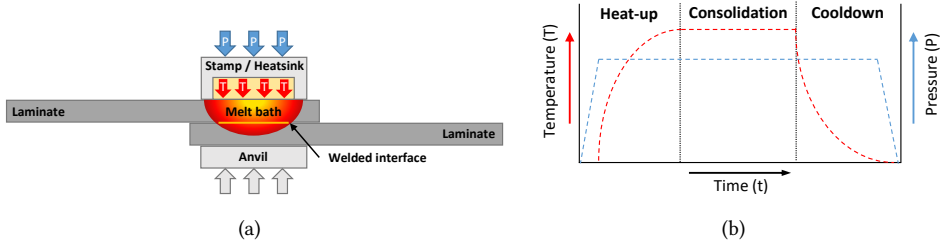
Conduction welding principle: a) Schematic; b) Typical manufacturing process cycle [11].
